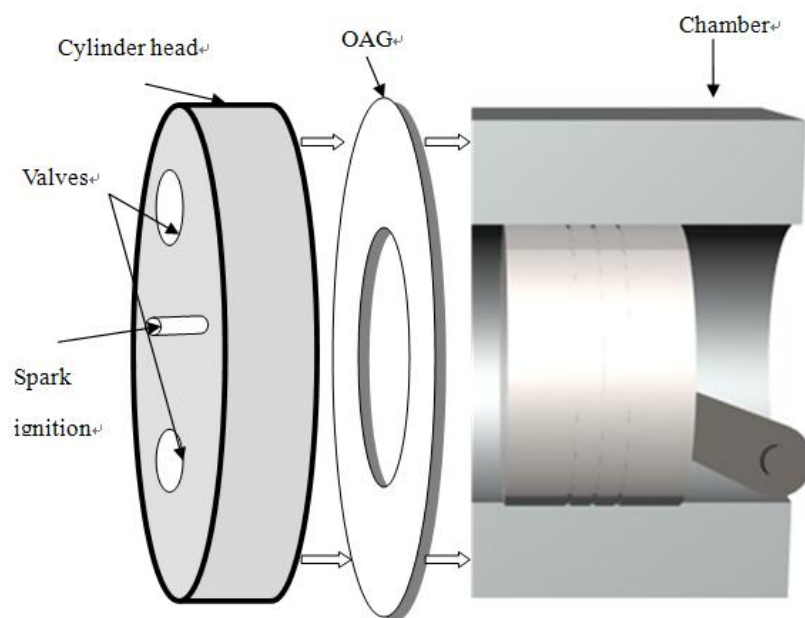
8 Schematic of OAG Assembling with Chamber and Cylinder head
